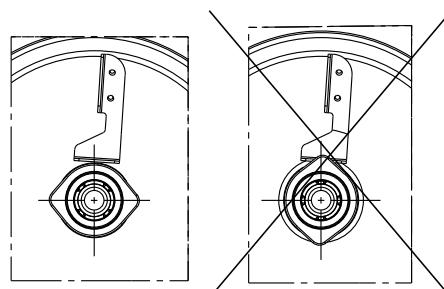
Fitting the stationary shaft seal part (only SiC/SiC)
